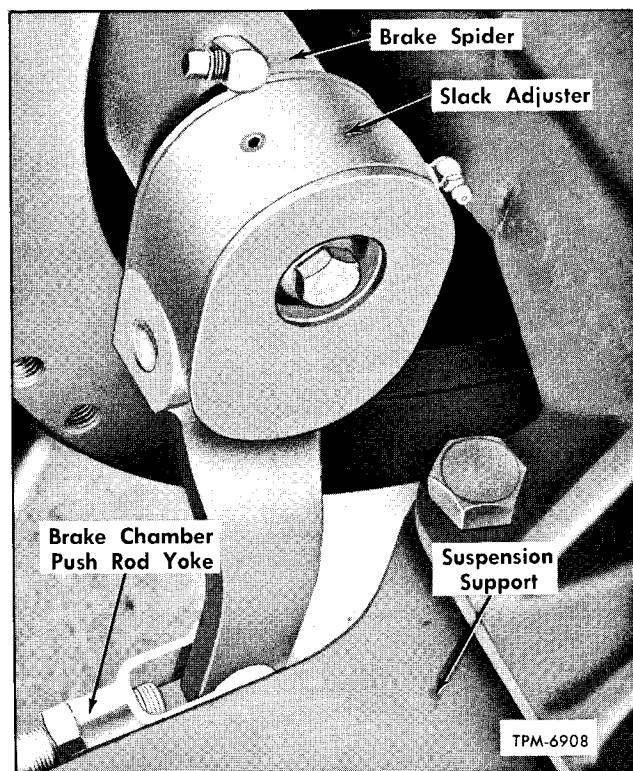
Slack Adjuster and Camshaft Mounted on Rear Axle
